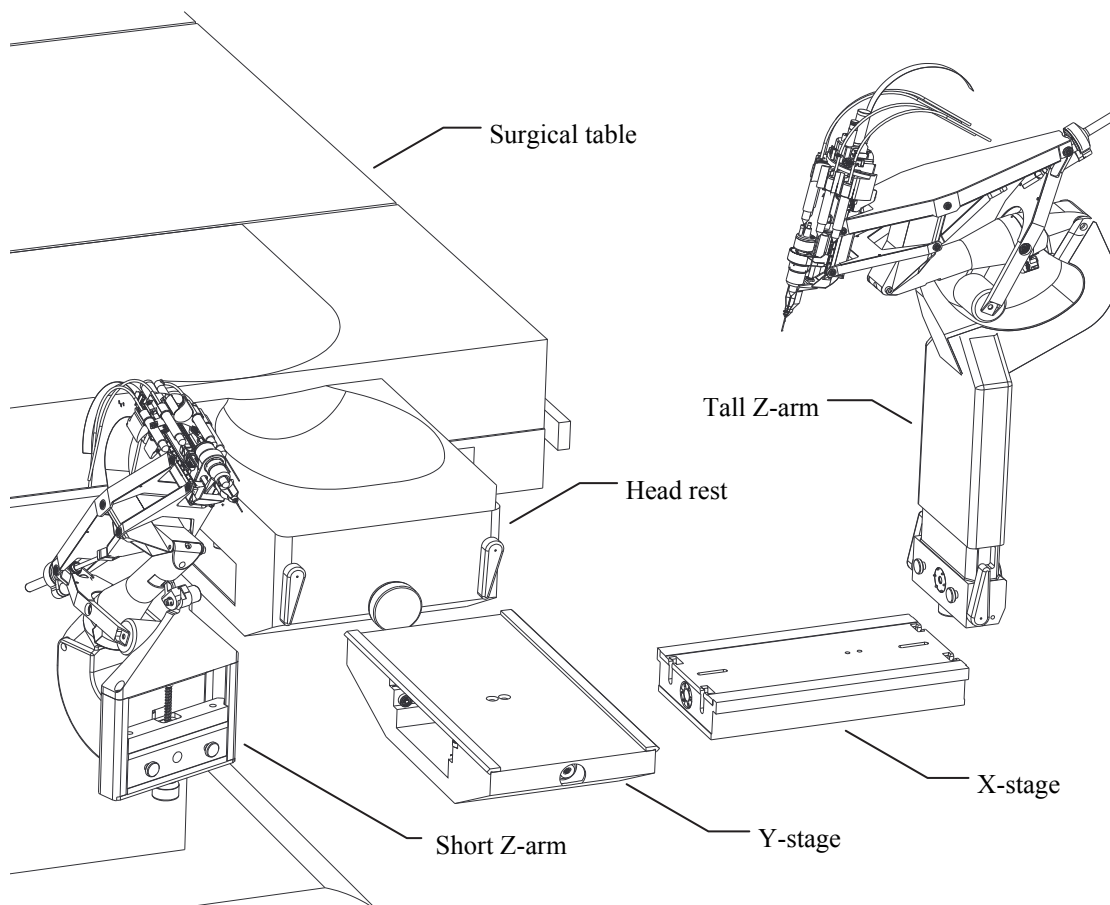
/ Exploded view of the modular pre-surgical adjustment system.
